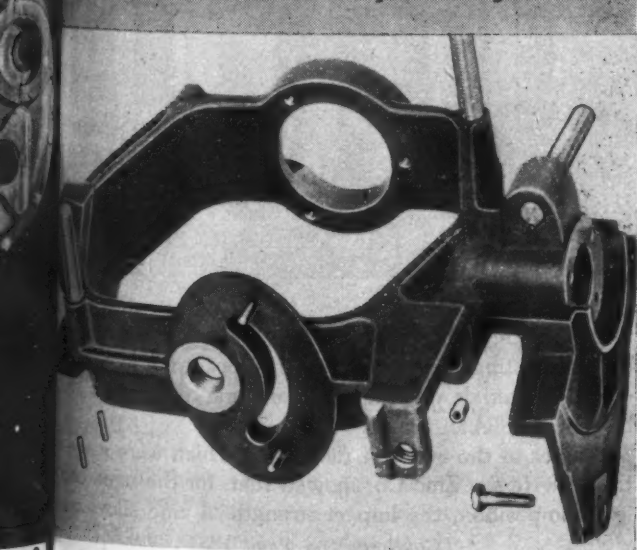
Aluminum typewriter frame showing the intricate precision details possible by die casting
